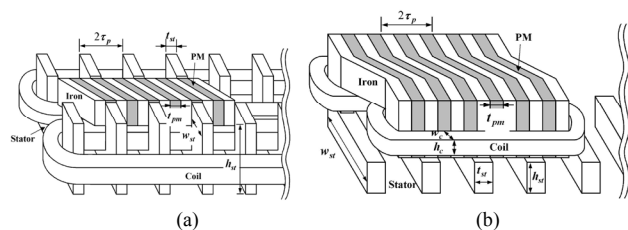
Conventional design of TFLMs (a) I-shaped mover core type (b) U-shaped mover core type
